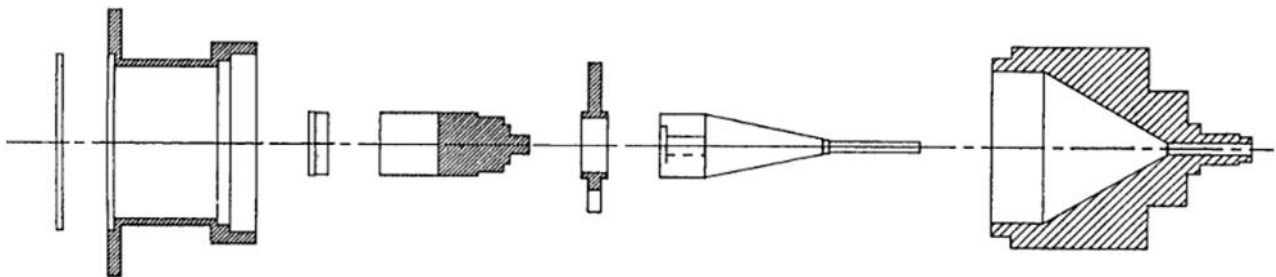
Half-section of the sample holder as per ASTM D 4935
